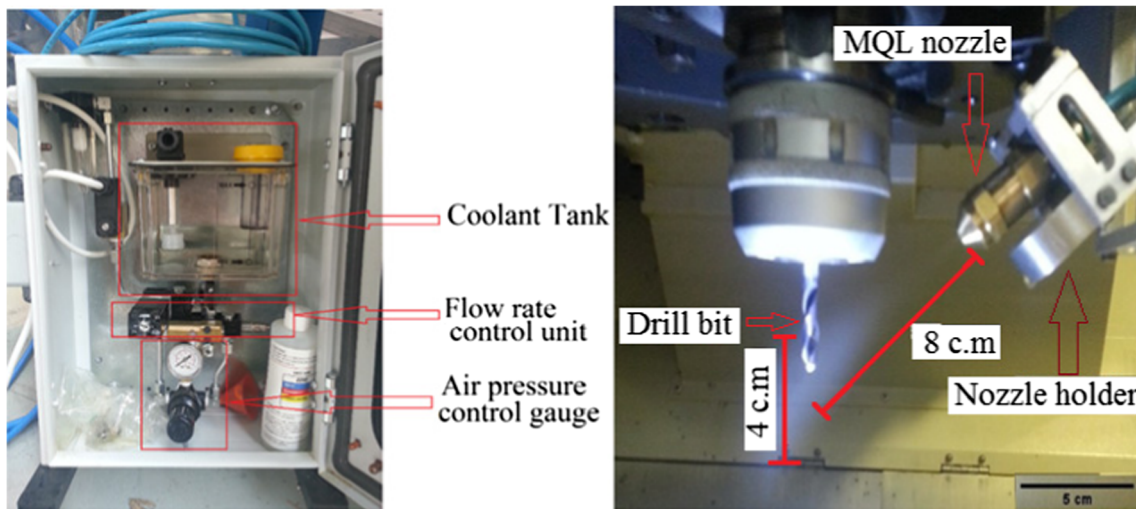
Characteristics of the MQL unit and nozzle setup inside the CNC machine [8, 9]
